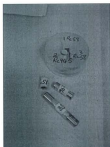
Hardness check of 440C stainless steel and alternate P7 rods.
